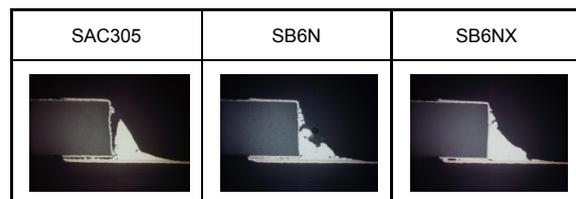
Cracking on ENIG finished PCBs after 3000 Thermal
